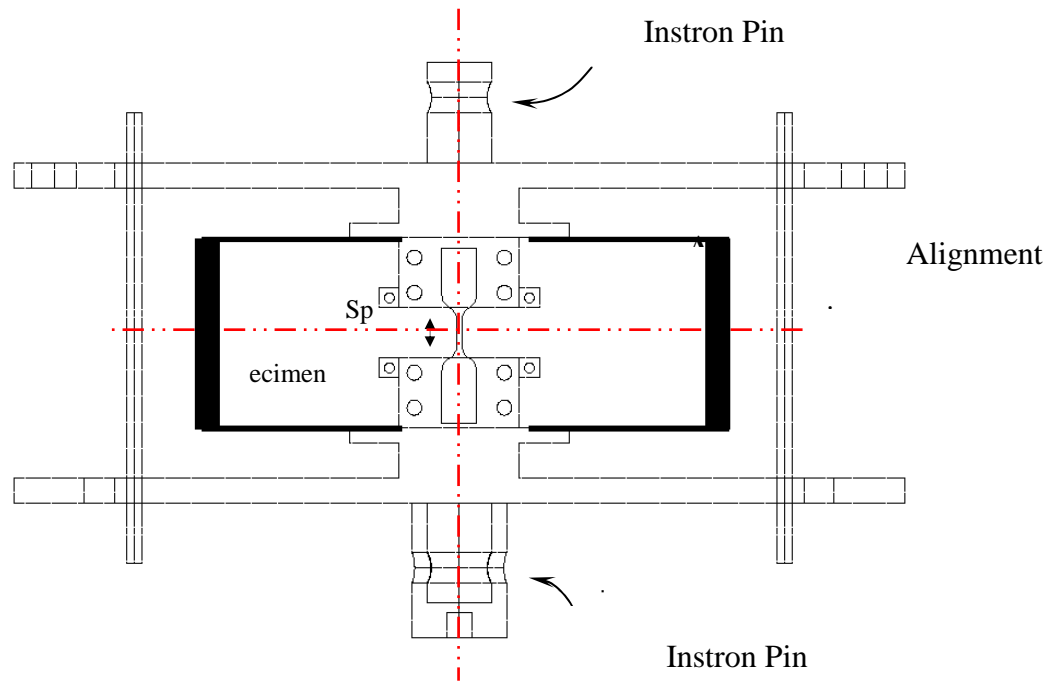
(a) AutoCAD drawing of the test-fixture.
